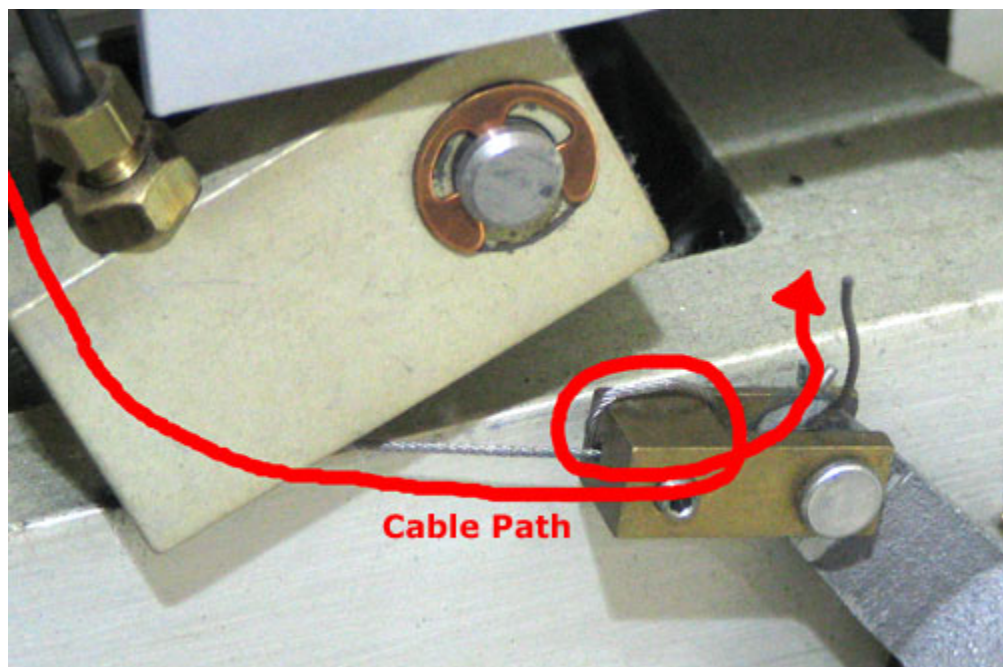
INTERLOCK CABLE AND MAIN CRADLE LATCH CABLE ROUTING
